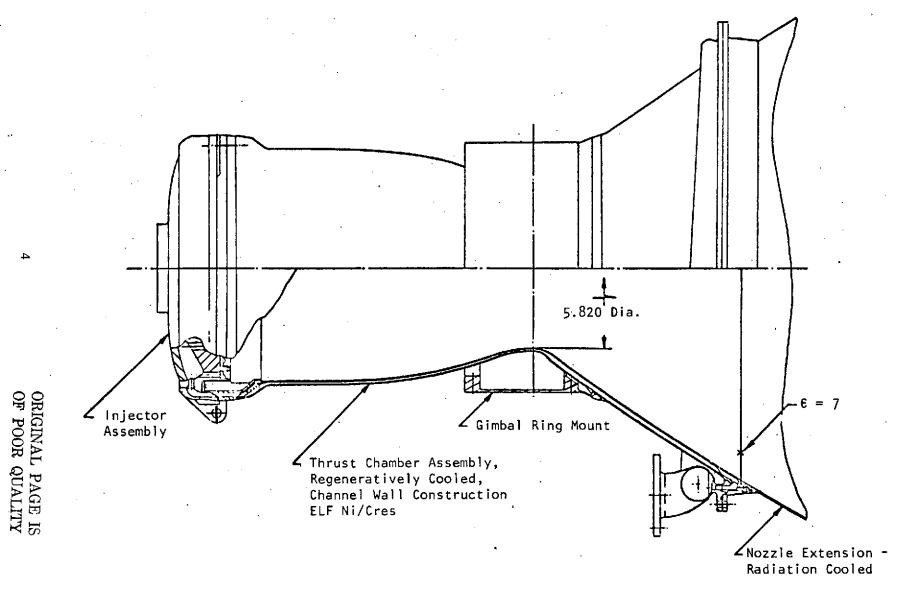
OME Thrust Chamber Assembly Flight Configuration
